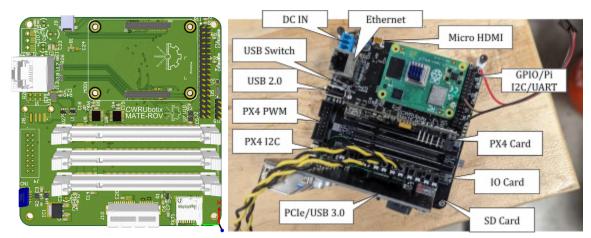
CAD view of Motherboard from Altium Designer (left) and finished Motherboard (right)
